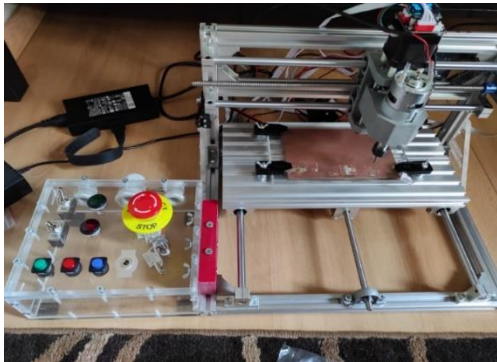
Assembly of mechanical and electric parts of the CNC machine.
